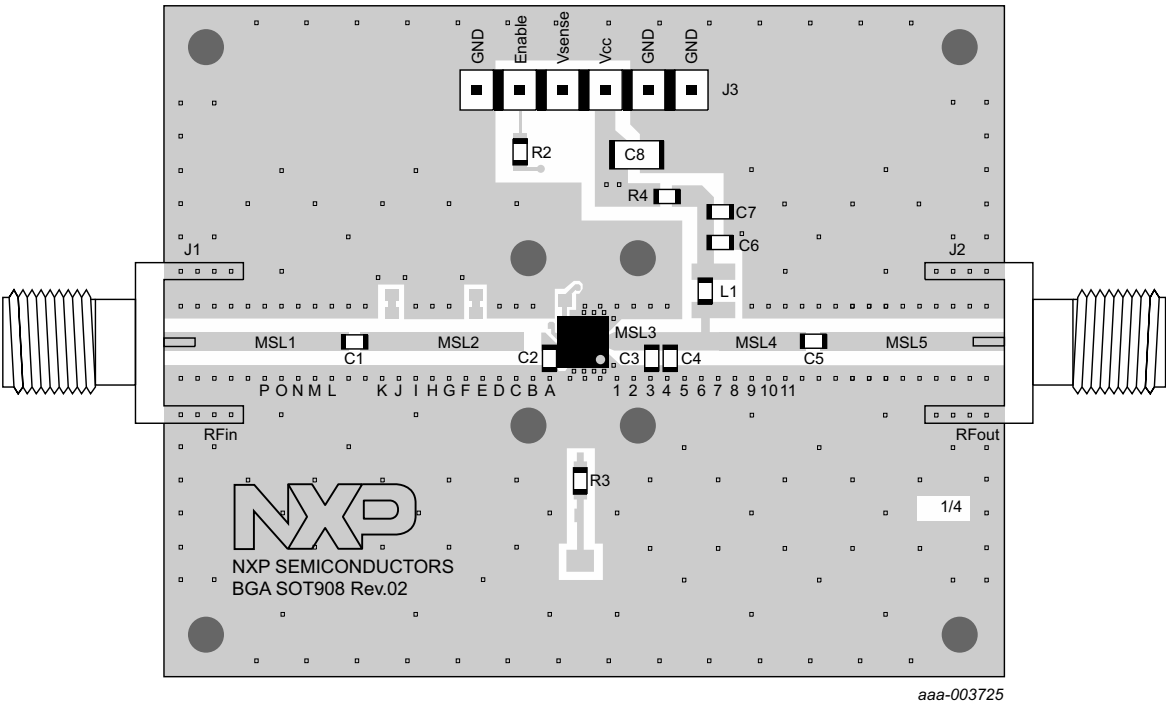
Top view of populated LTE-2140 Printed-Circuit Board (PCB)
